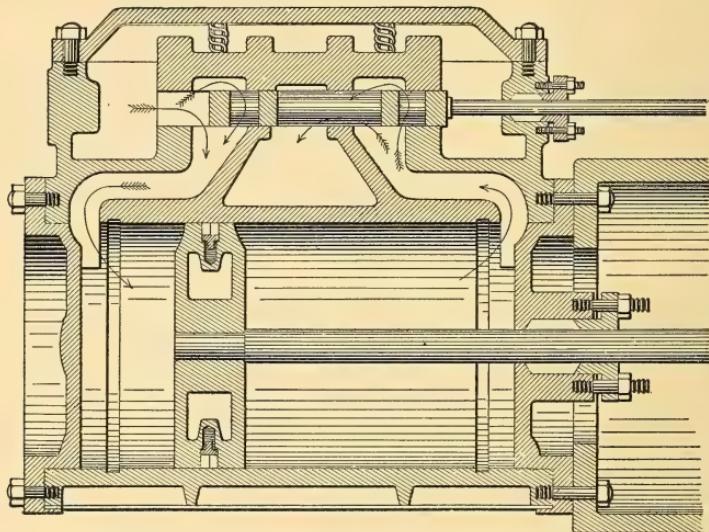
Section of Atlas Medium Speed Engine, Showing Balanced Slide Valve.
